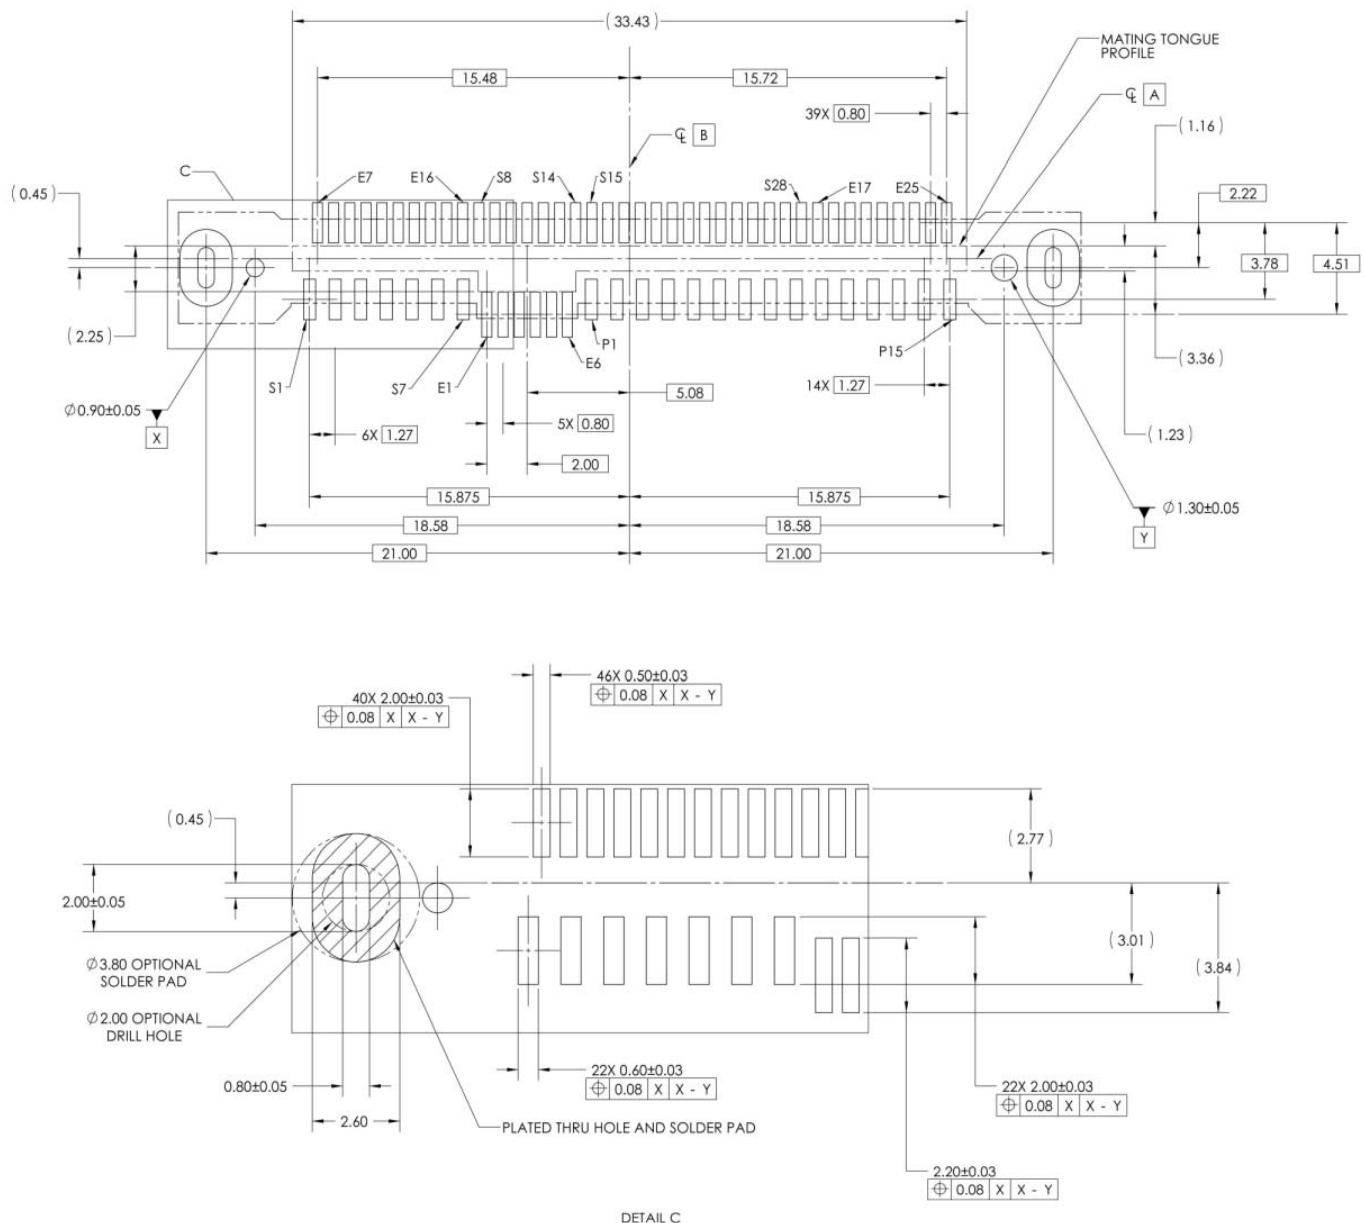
RECEPTACLE PCB FOOTPRINT EXAMPLE
